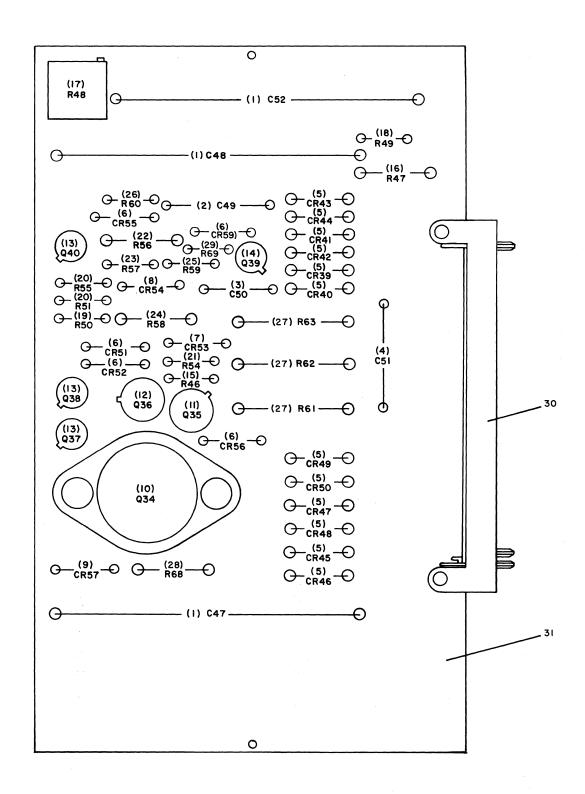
400HZ FRONT END CIRCUIT CARD ASSEMBLY A1A1
